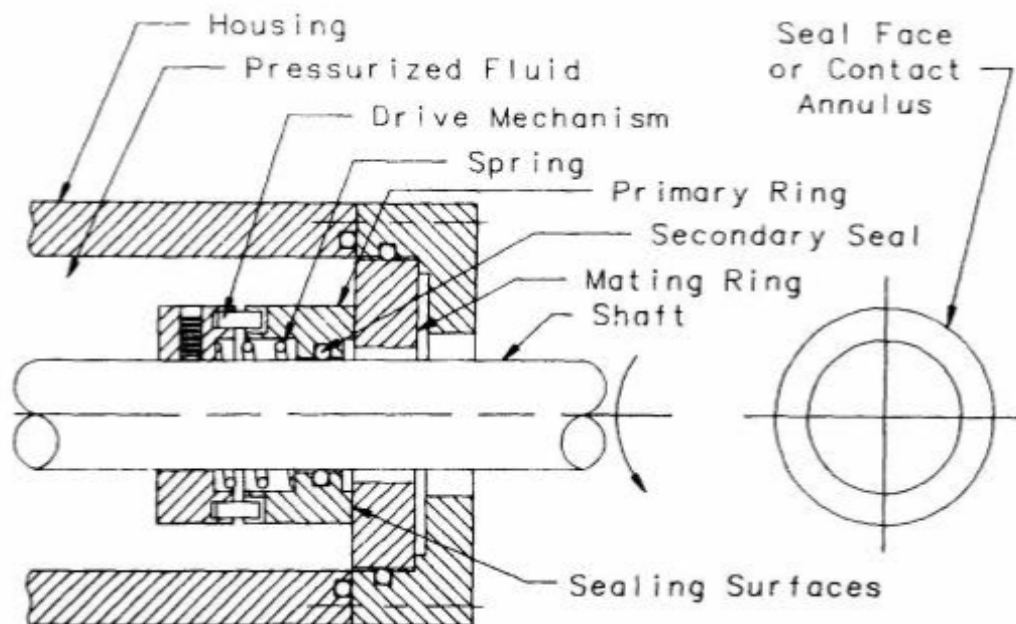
Mechanical face seal- outside pressurized, rotating primary ring, fixed mating ring (Lebeck A. O., 1991)
